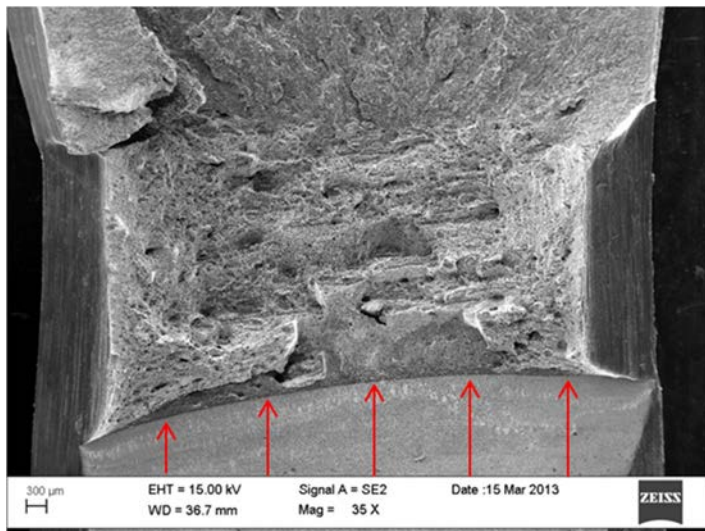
shows the fracture surfaces of the normal-sized HAZ specimens as-welded and PWHT states. Fracture surfaces of the HAZ samples showed only ductile fracture. In the specimens of both heat treatment conditions, the cracks propagated towards the fusion line and the propagation seemed to happen in shorter distance in the PWHT specimens. However, in one as-welded state specimen, the crack propagated towards the SA 508 base metal (fracture surface shown in Figure 146). This can be explained by the exact location of the pre-fatigue crack tip in that specimen. The tip of the pre-fatigue crack in that specimen
